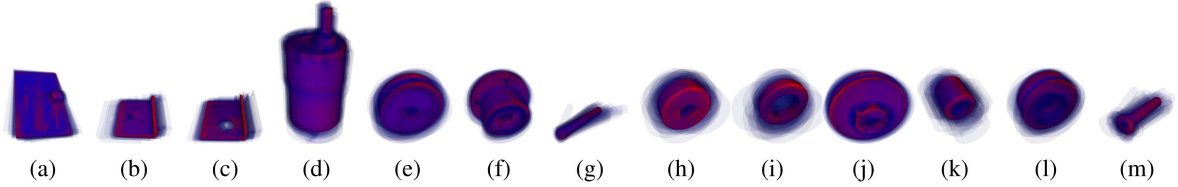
All parts with initial uncertainties for the planning experiment. (a) base plate, (b) panel motor, (c) panel bearing, (d) motor, (e) motor pulley, (f) bearing, (g) shaft, (h) end cap, (i) bearing spacer, (j) output pulley, (k) idler spacer, (l) idler pulley, (m) idler pin. The red shape represents the pose belief, the blue shapes random samples from the probability distribution.
